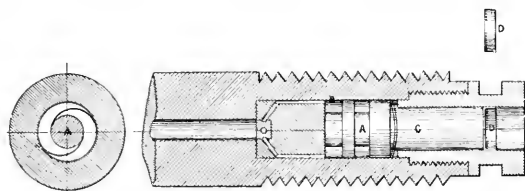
Crusher Gauge (from *Artillery and Explosives*, by Sir A. Noble)
